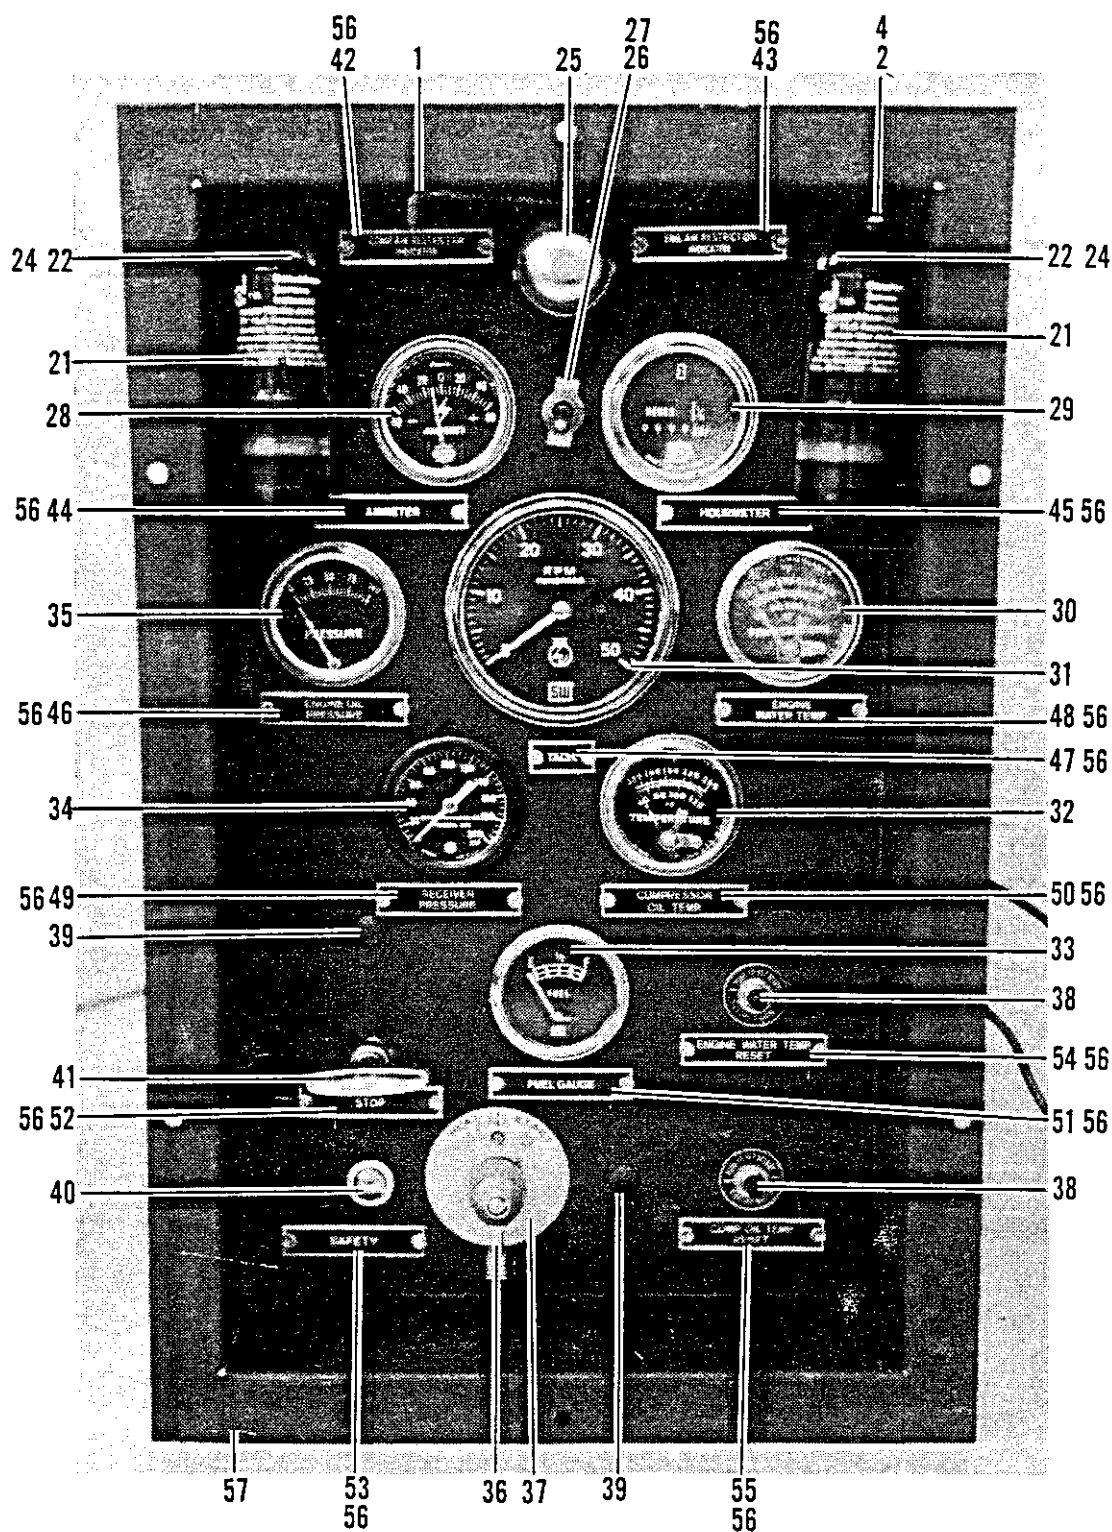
Instrument box assembly (sheet 2 of 2)
